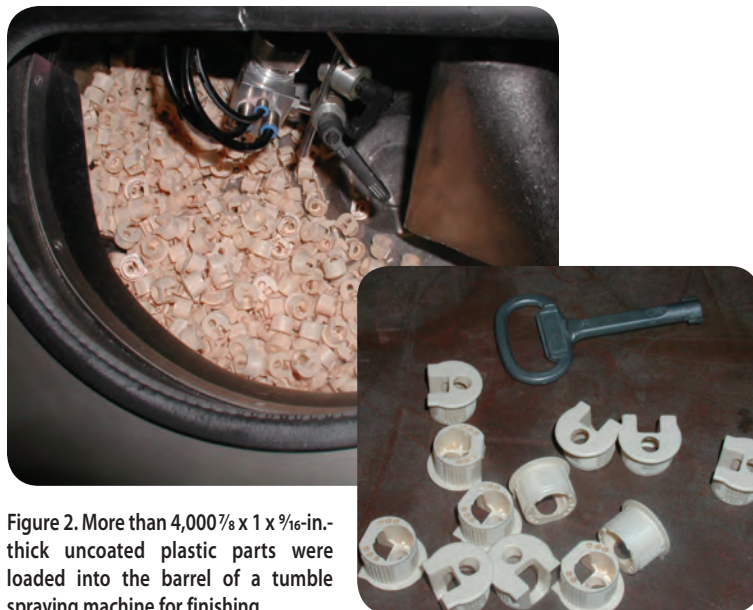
More than 4,000 $\frac{7}{8}$ x 1 x $\frac{1}{16}$ -in.-thick uncoated plastic parts were loaded into the barrel of a tumble spraying machine for finishing.
